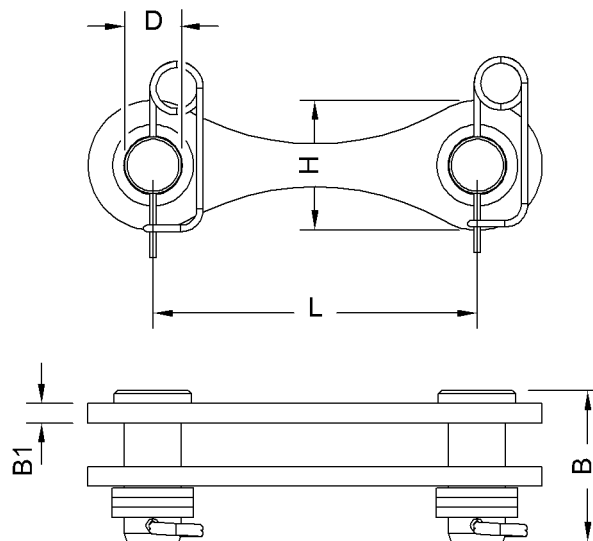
Dimensions of mid-point suspension backstay shackle with pins on the main boom after the attached reducing piece
